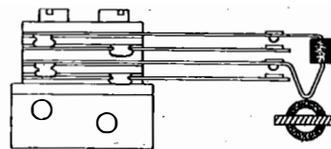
OFF-NORMAL SPRING ASSEMBLY.
